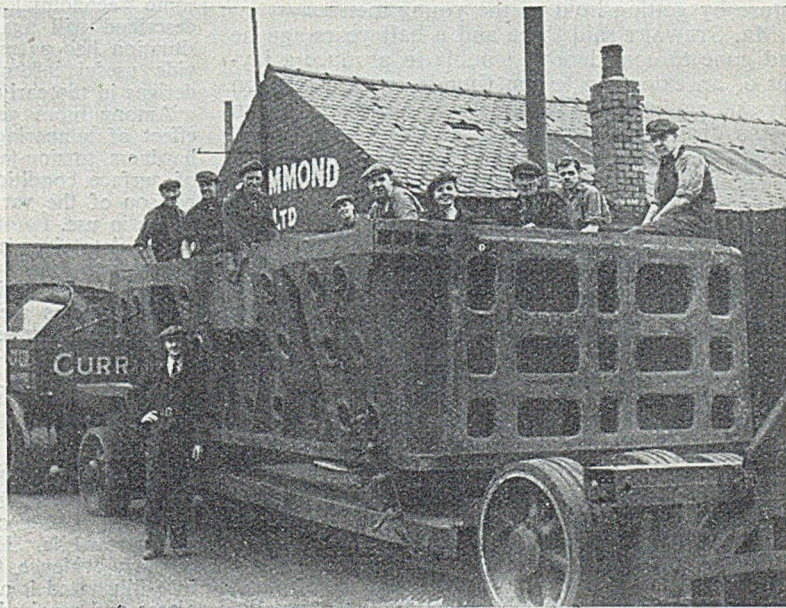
Base Casting weighing 24 tons for a Turbine Gear Case of a Marine Engine.
